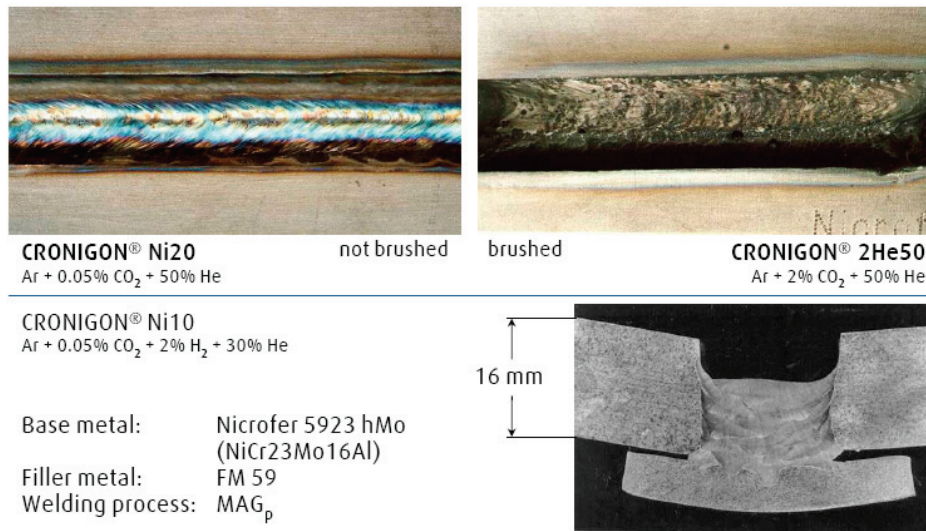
Mag welding of Ni-alloys-shielding gas influence
